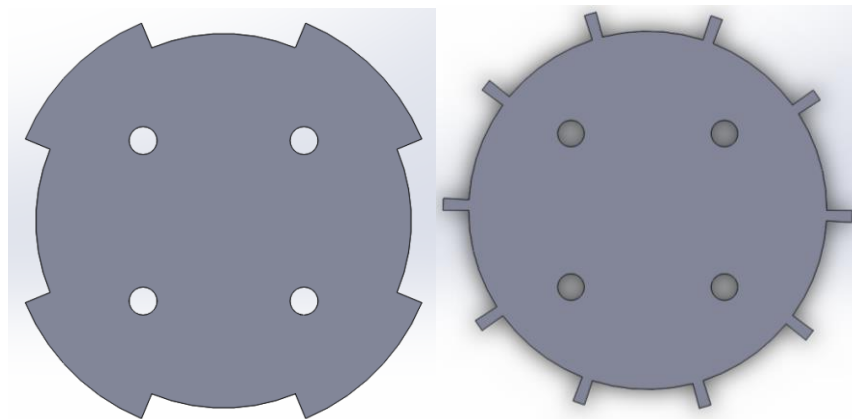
Discontinuous Workpieces: 40 mm Contact (left), 3 mm Contact (right)
